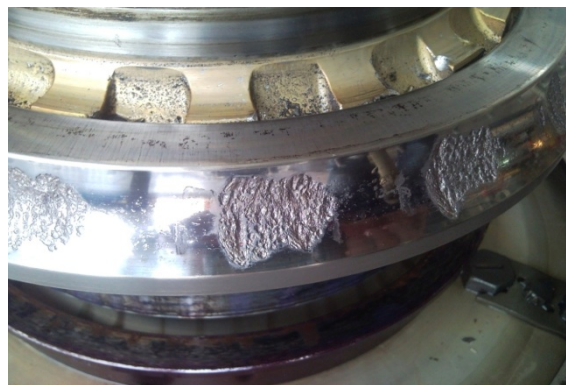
Inner race of the upper (main) bearing of Mi-24 gearbox – damaged bearing
